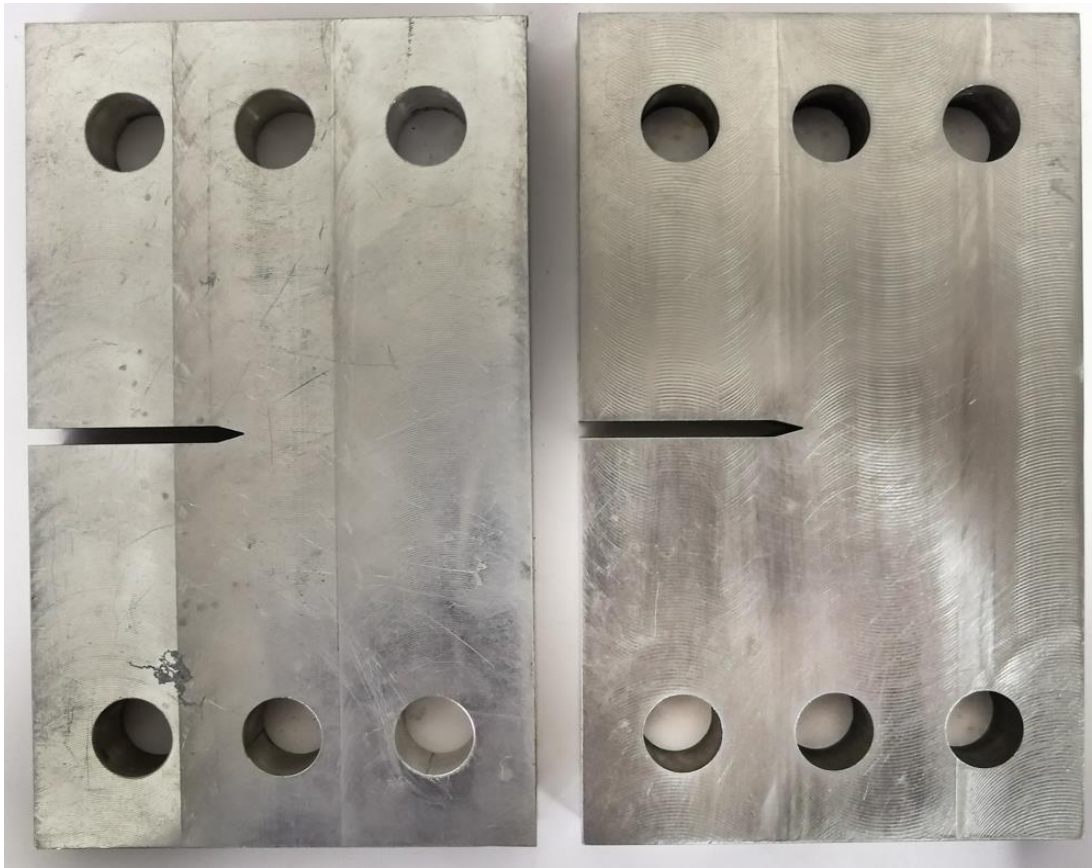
Photograph of the fabricated CTS specimen Al 6061-T6 (left) and SS 316 (right)
